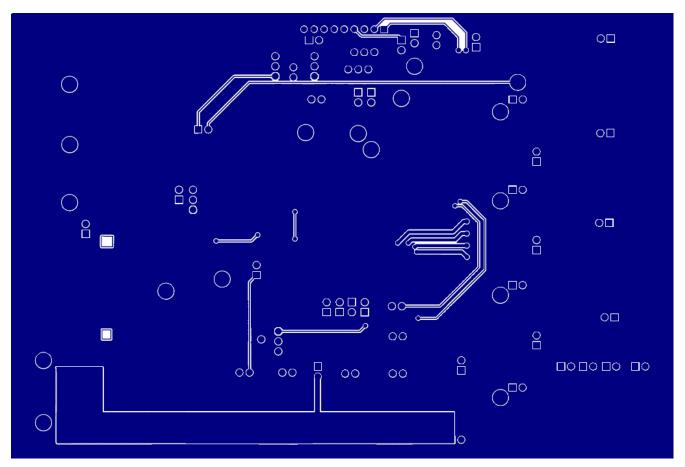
ISL97687 BOTTOM LAYER OF EVALUATION BOARD
